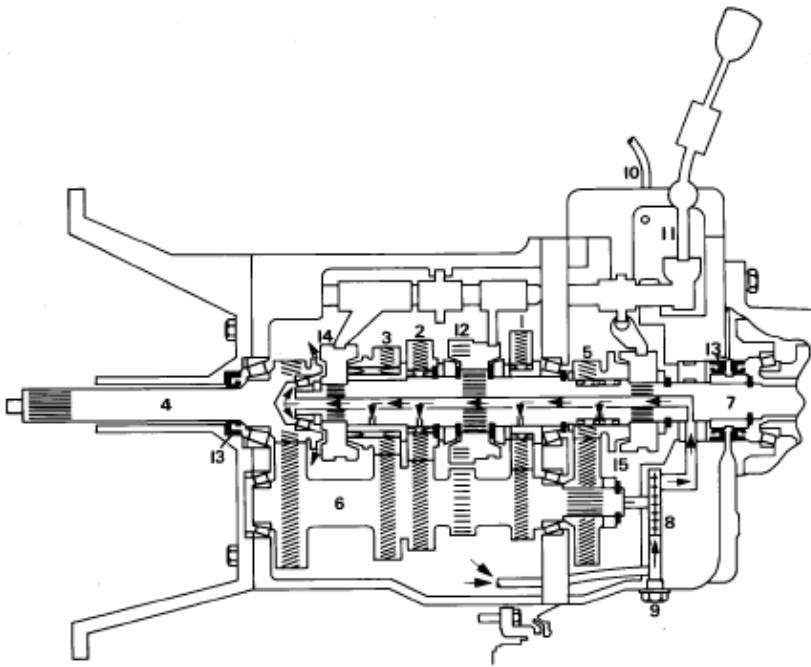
Assembly of 1996 Land Rover Discovery Manual Gearbox [12]
